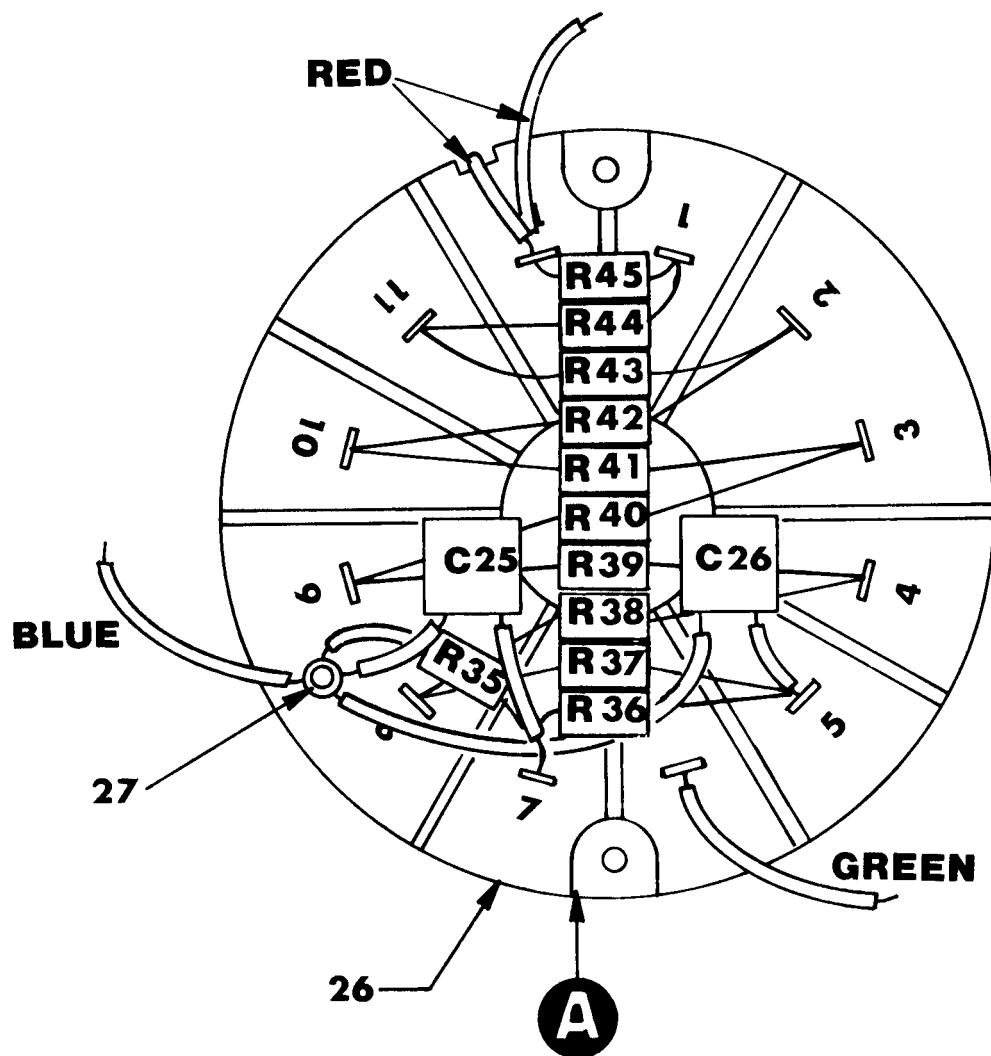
X-Ray Probe, Exploded View (Sheet 1 of 2 Sheets)
